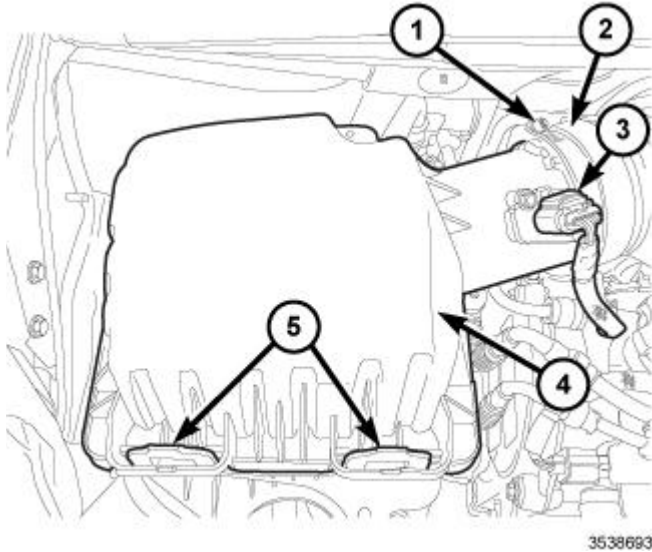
Clamp, Turbocharger Air Inlet Tube, Mass Airflow (MAF) Sensor Harness Connector, Intake Air Housing & Tabs
